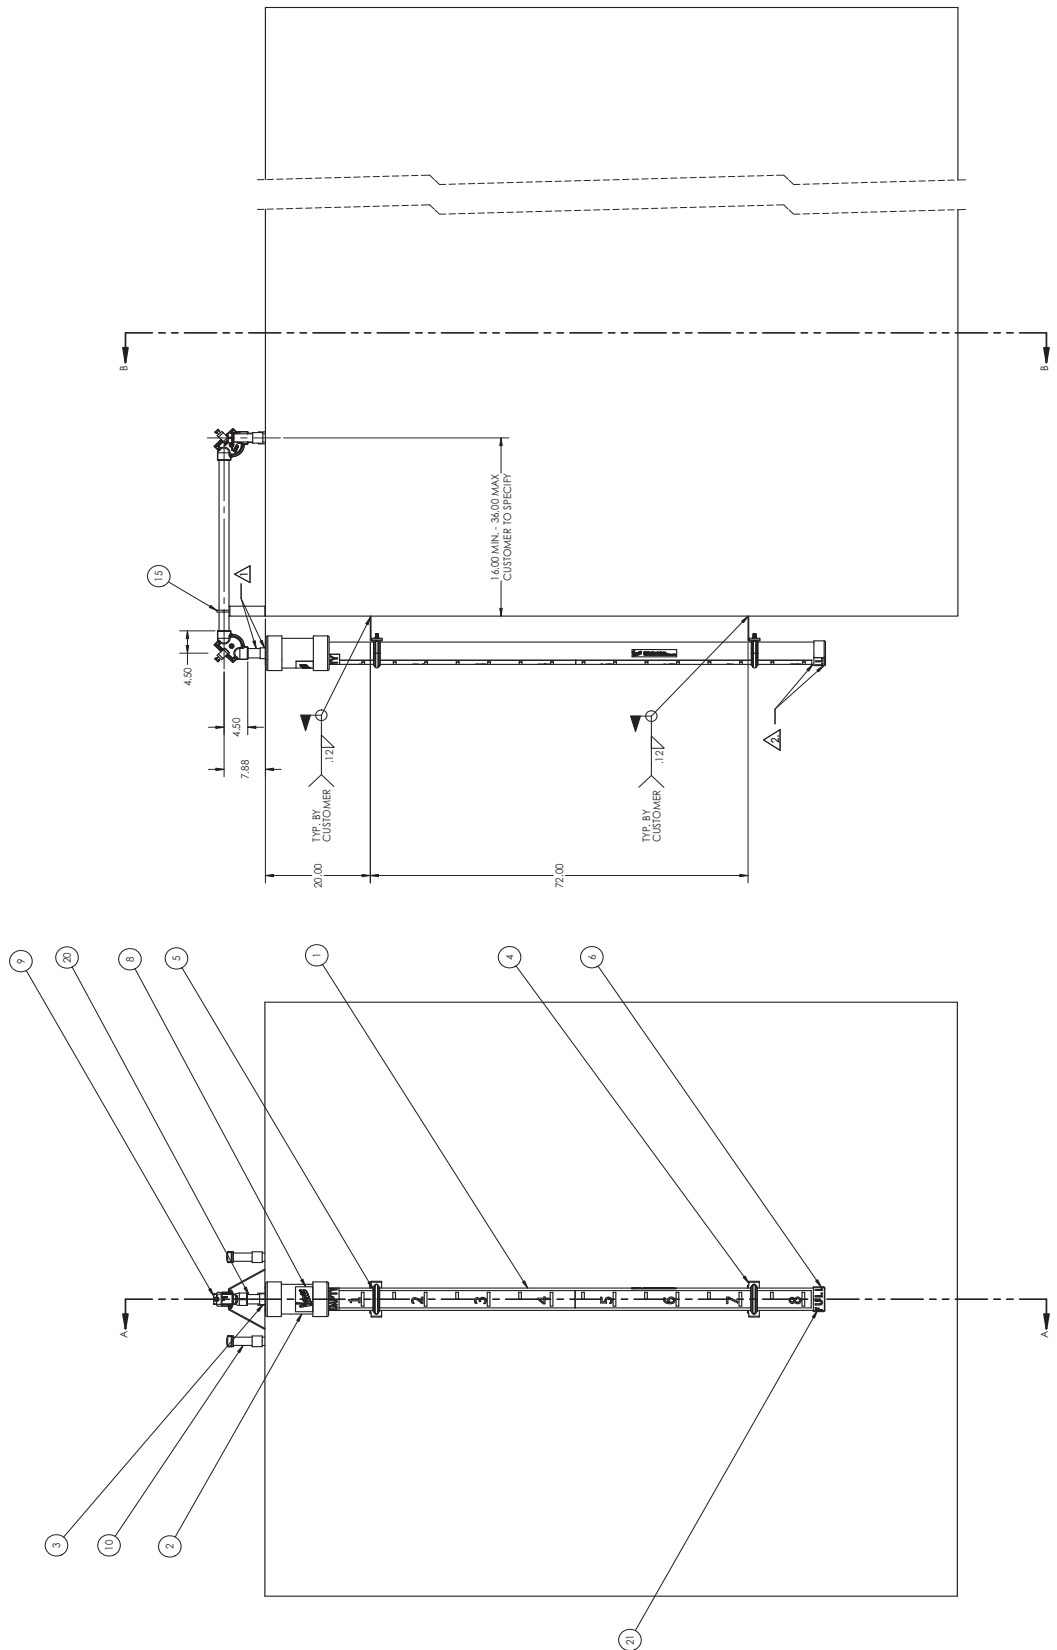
Tube Style Level Gauge for Mobile Tank Top Assembly Side View
